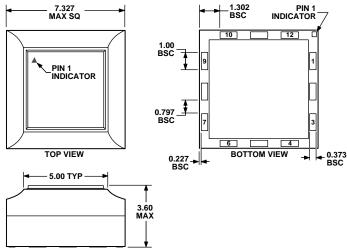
12-Terminal Land Grid Array [LGA] (CC-12) Dimensions shown in millimeters
